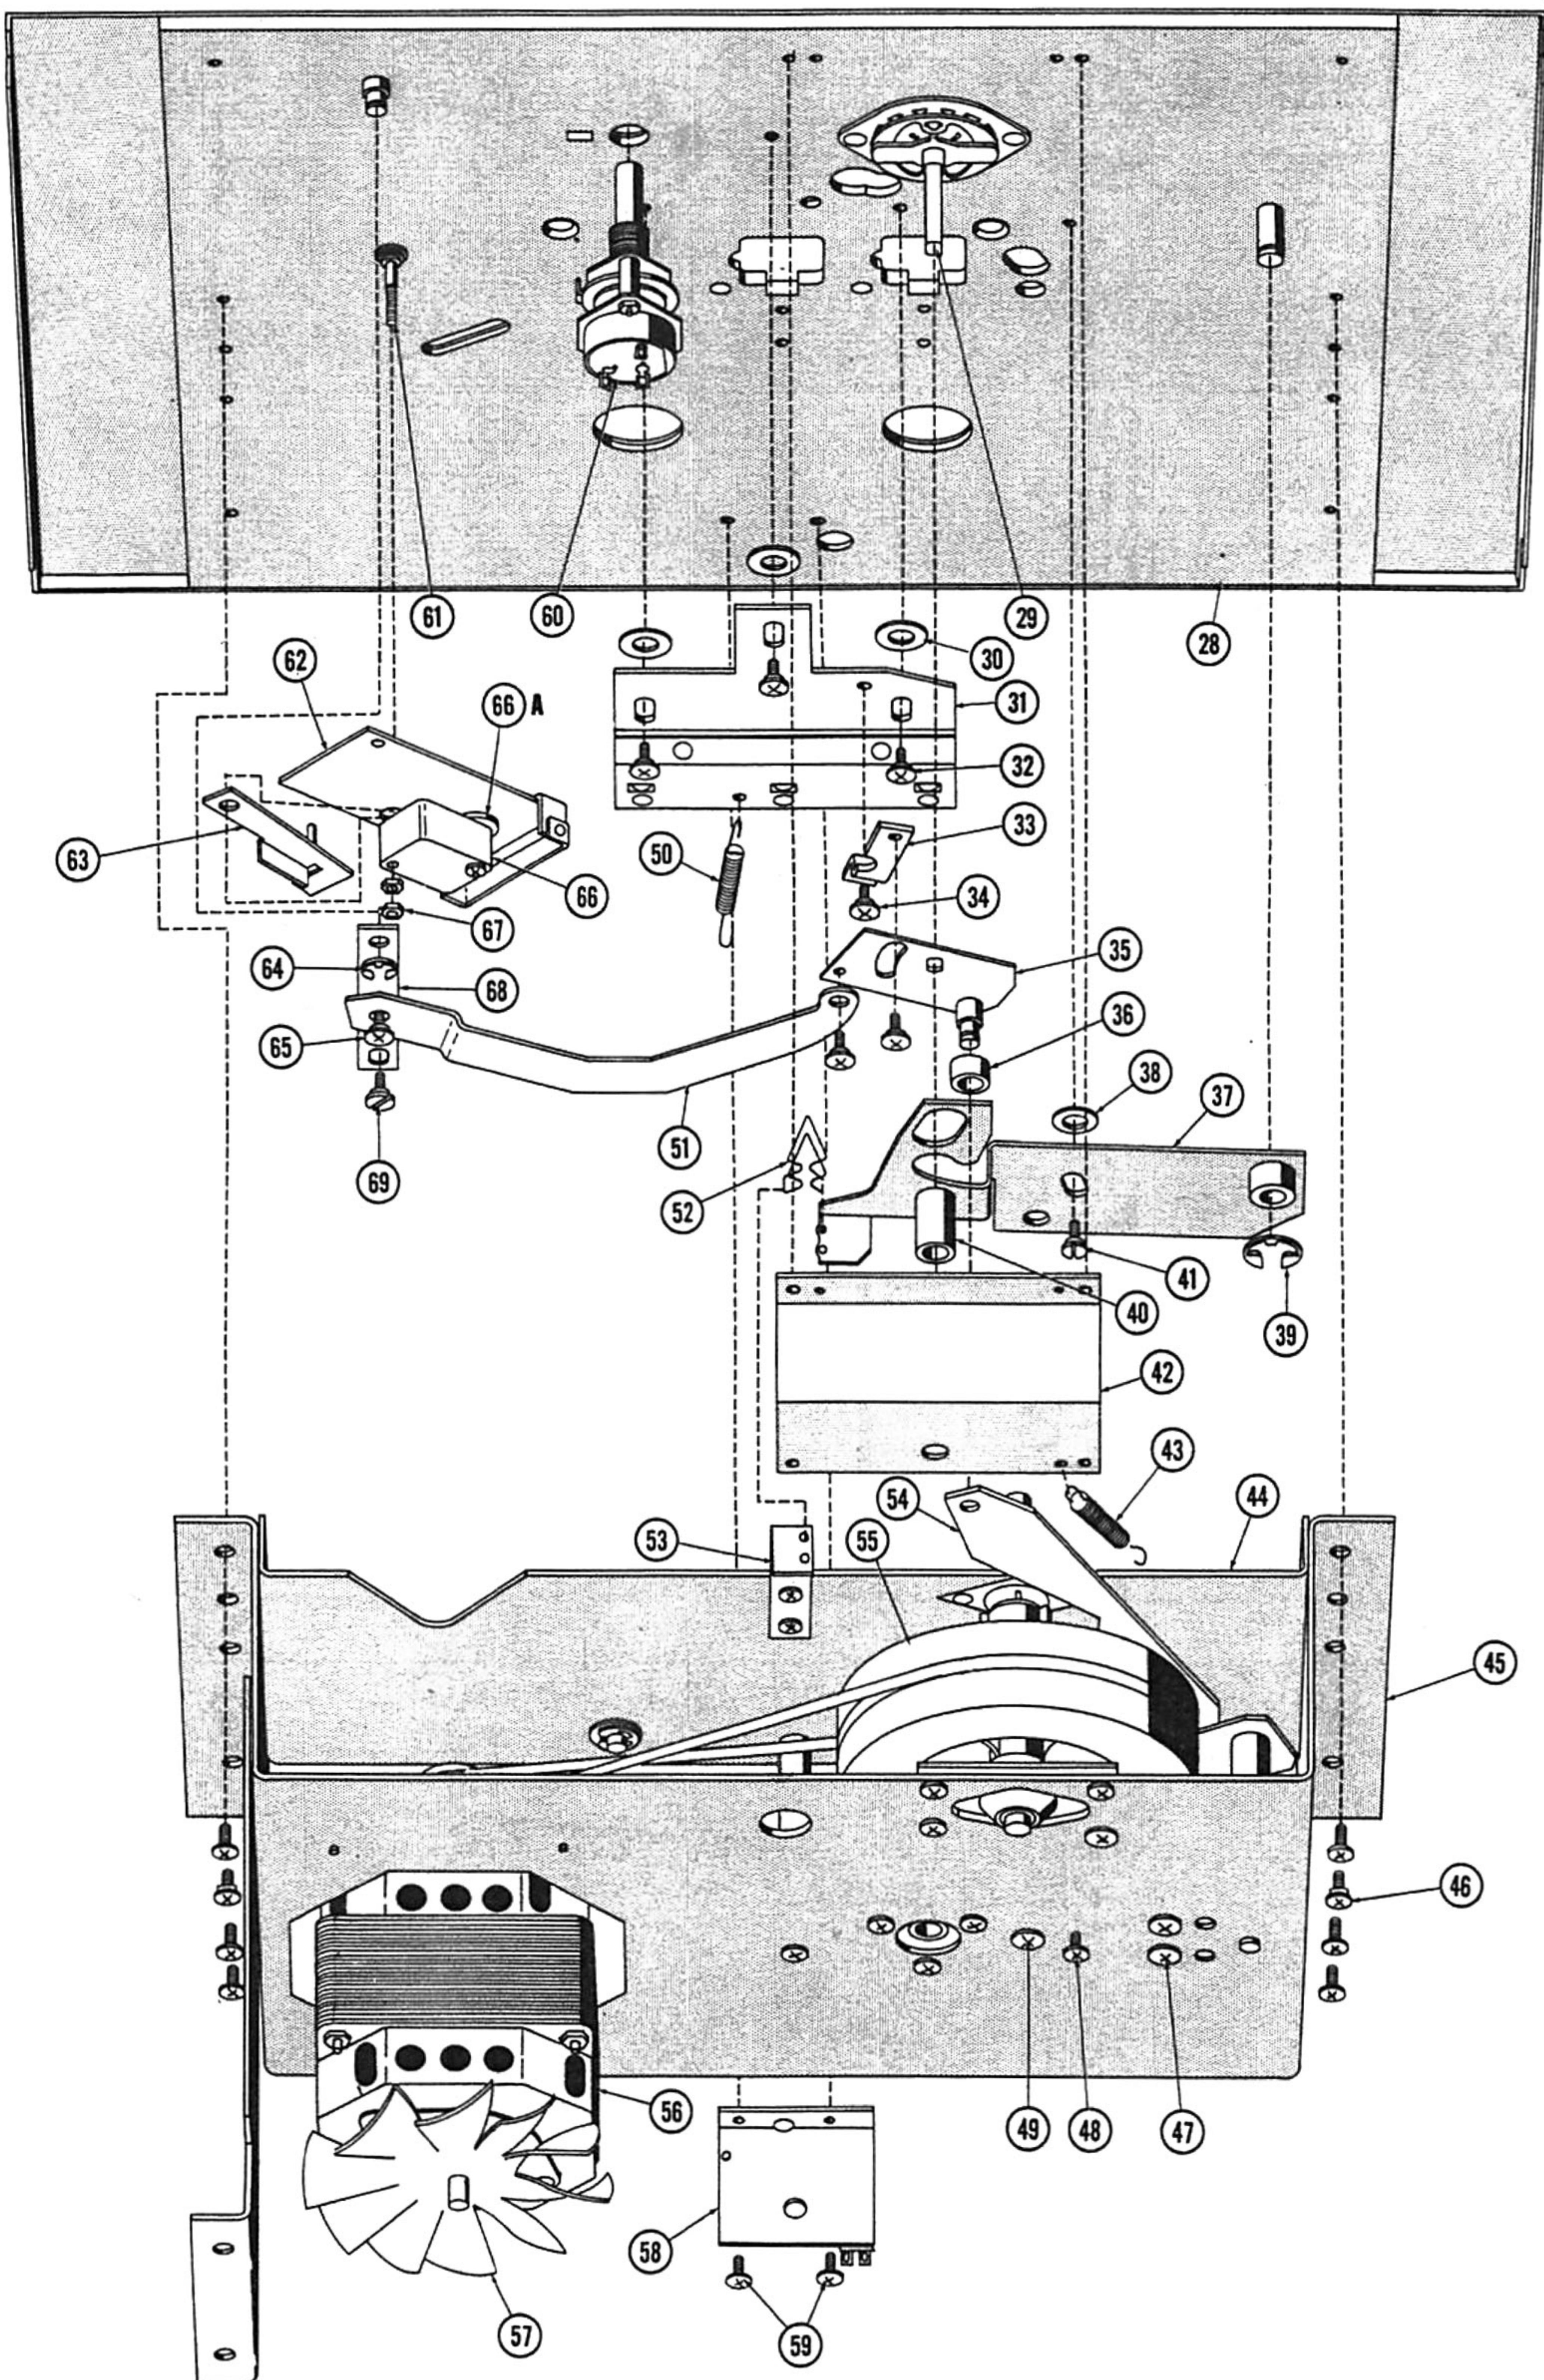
B EXPLODED VIEW OF PARTS BELOW DECK PLATE
